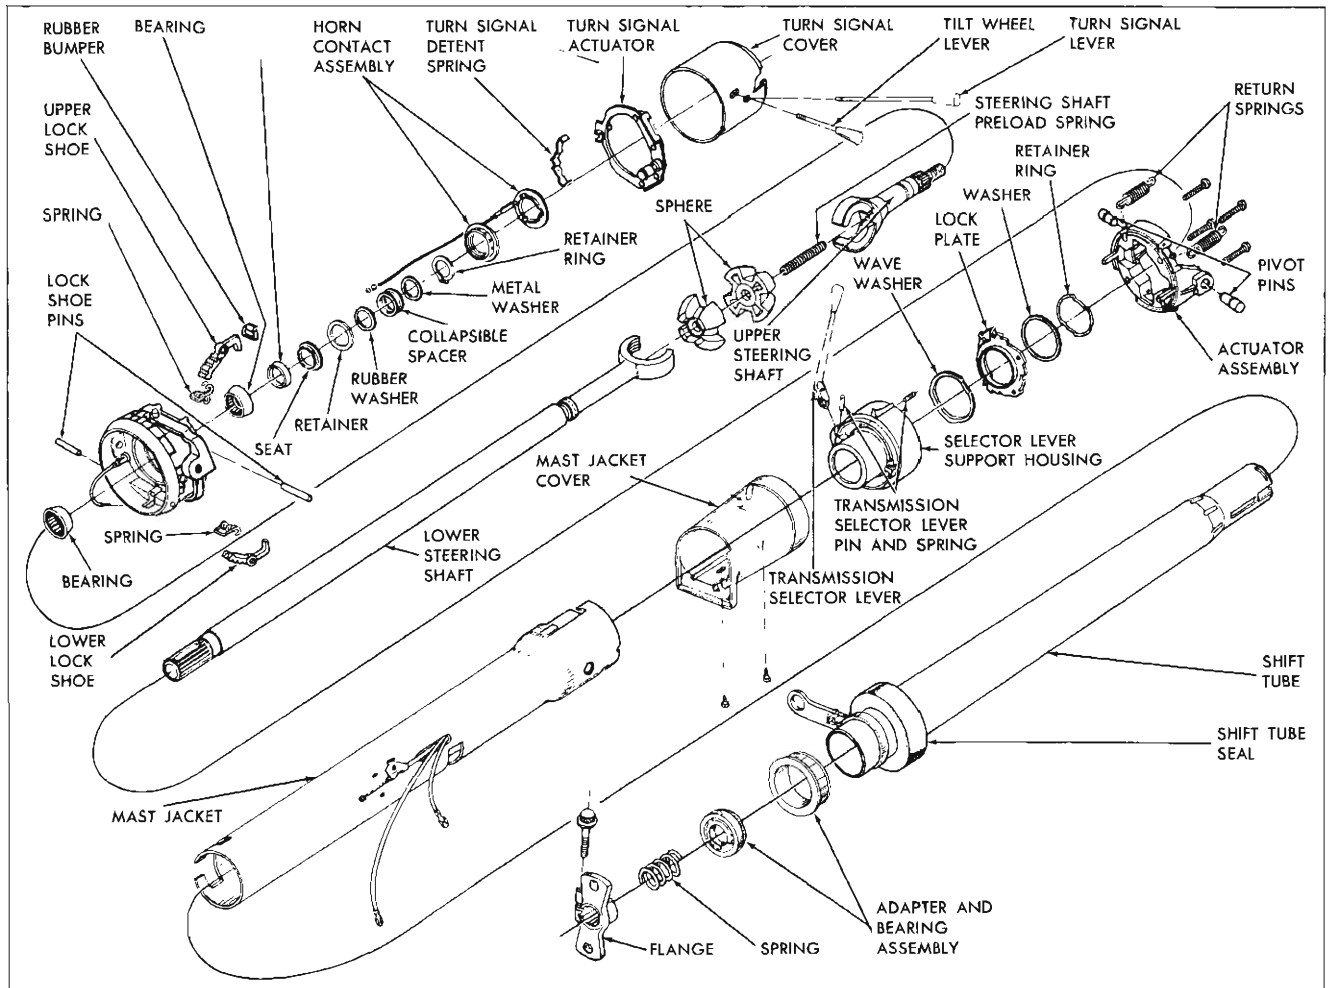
Exploded View of Tilt Wheel Steering Column (as used with Powerglide)
